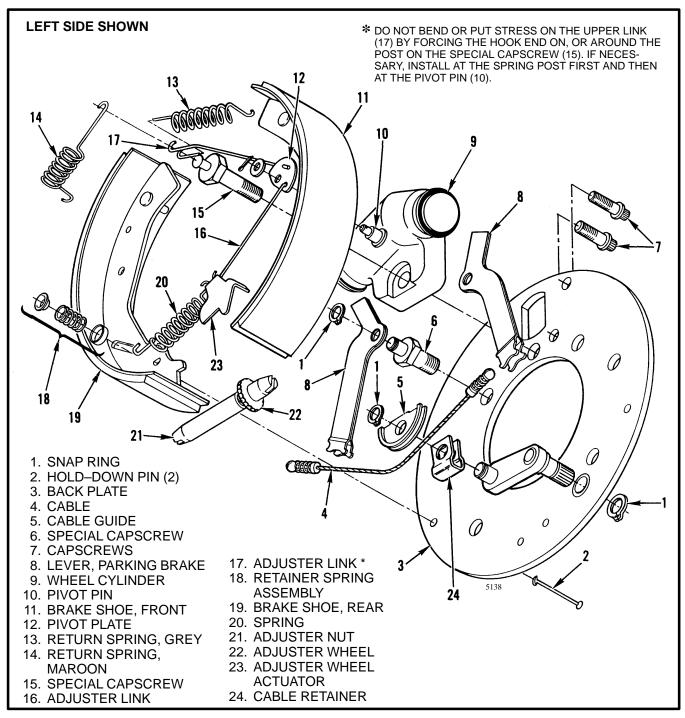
BRAKE ASSEMBLY, E/J2.00–3.00XL (E/J40–60XL)
